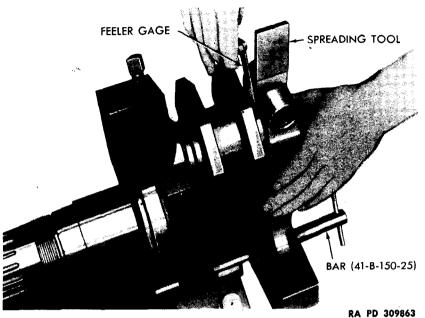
Measuring End Clearance Between Master Rod and Rear Crankshaft
